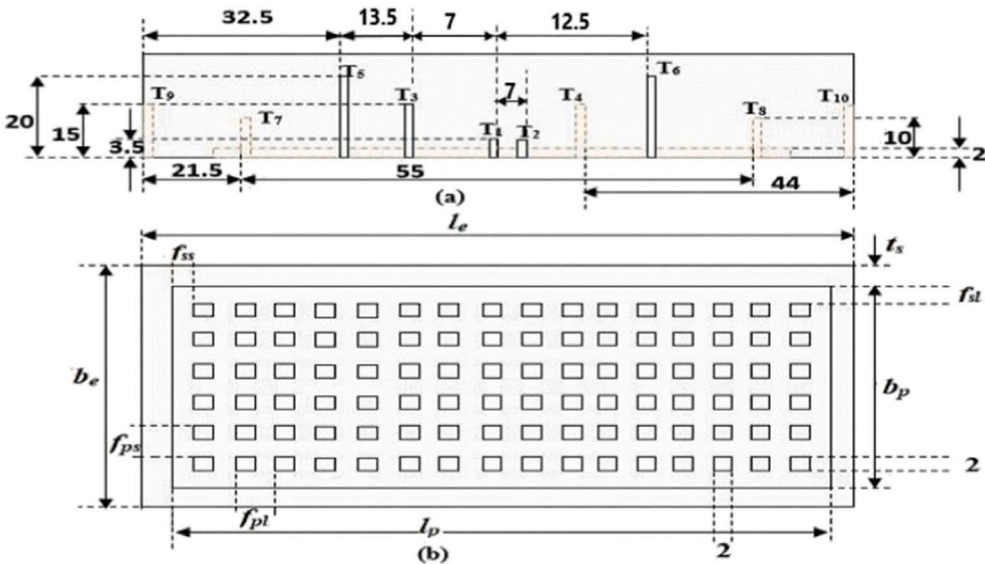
Thermocouple positioning for both the heat sinks with dimensions in mm (a) front view and (b) top view.
